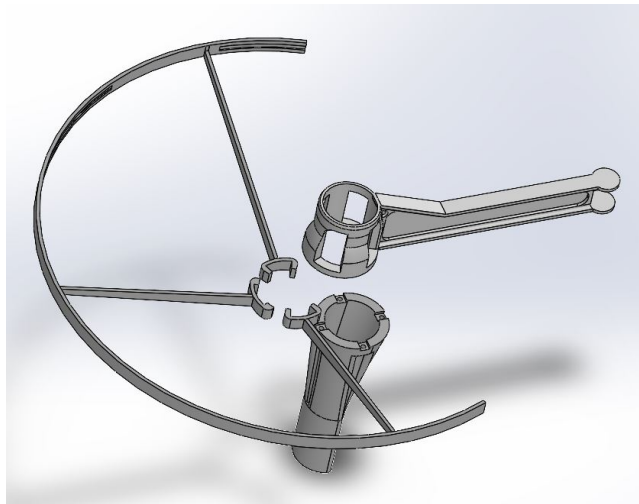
Exploded view of the “DALE” drone propeller arm, showing the various parts that it consists of.
